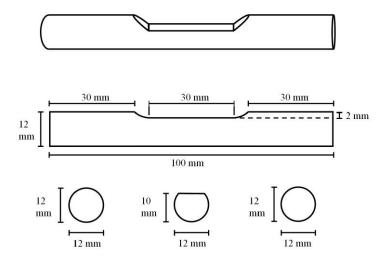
The geometry of the tensile specimens. In the bottom, the transverse cross sections along the specimens.
